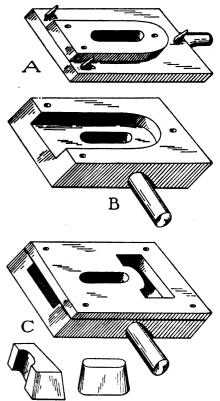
Tools for shearing the ends and punching keyholes in spring hangers.
